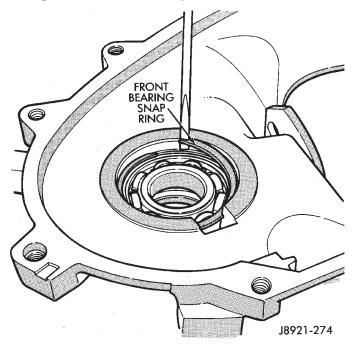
Front Output Shaft Front Bearing Snap-Ring Removal
